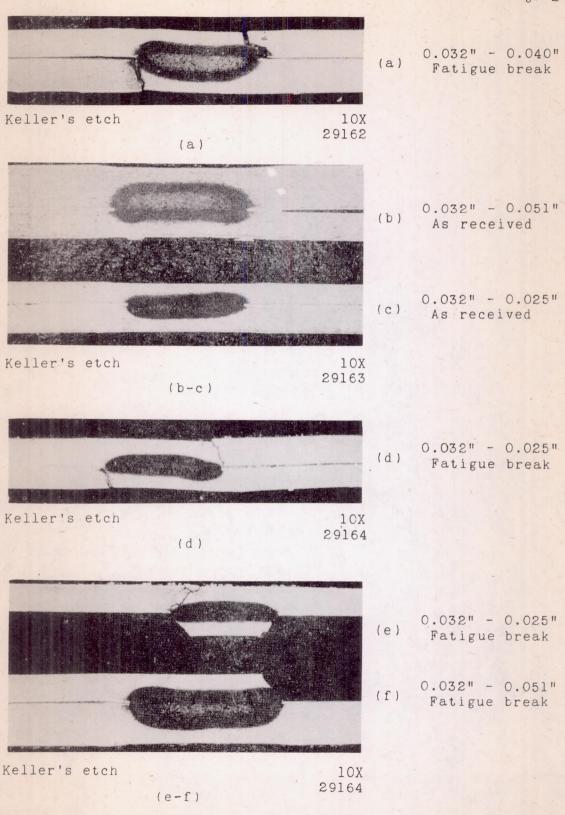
Spot welds in dissimilar gauge sheet - Company C welds.
